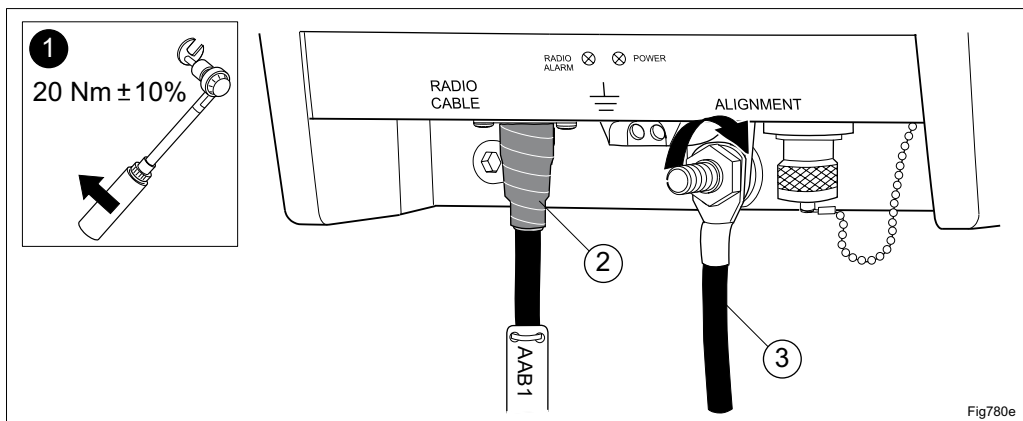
Connecting the cables to RAU2, RAU1 is similar.
